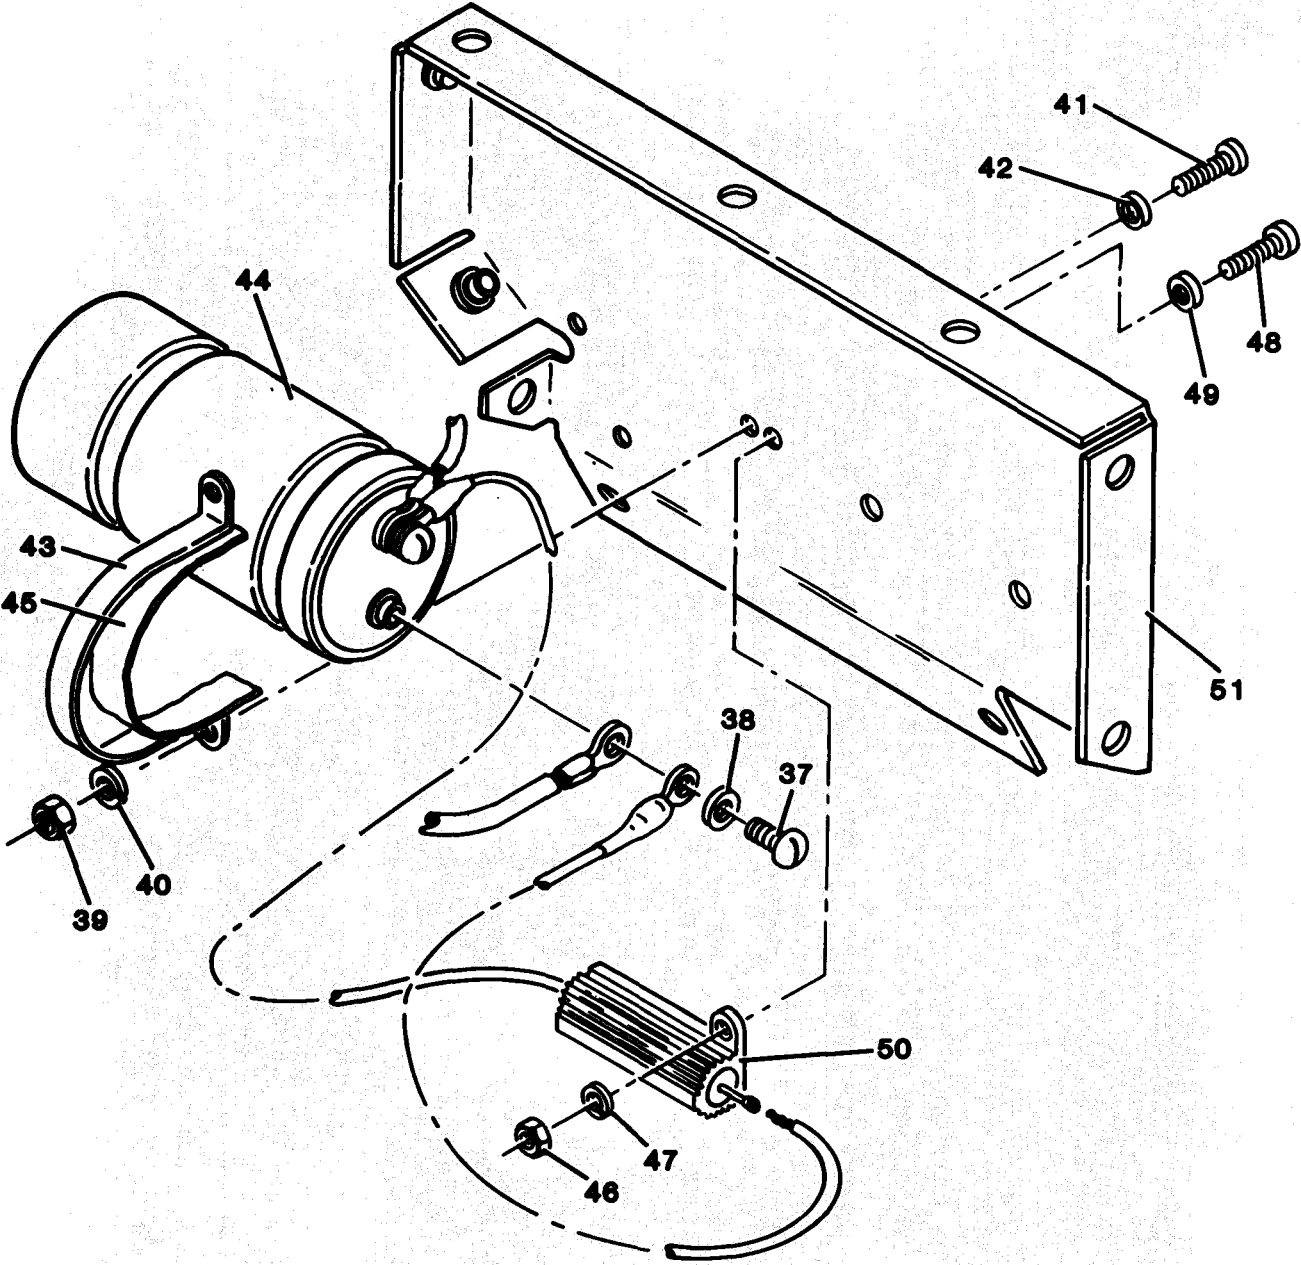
Filter Box Assembly (Sheet 3 of 4)
